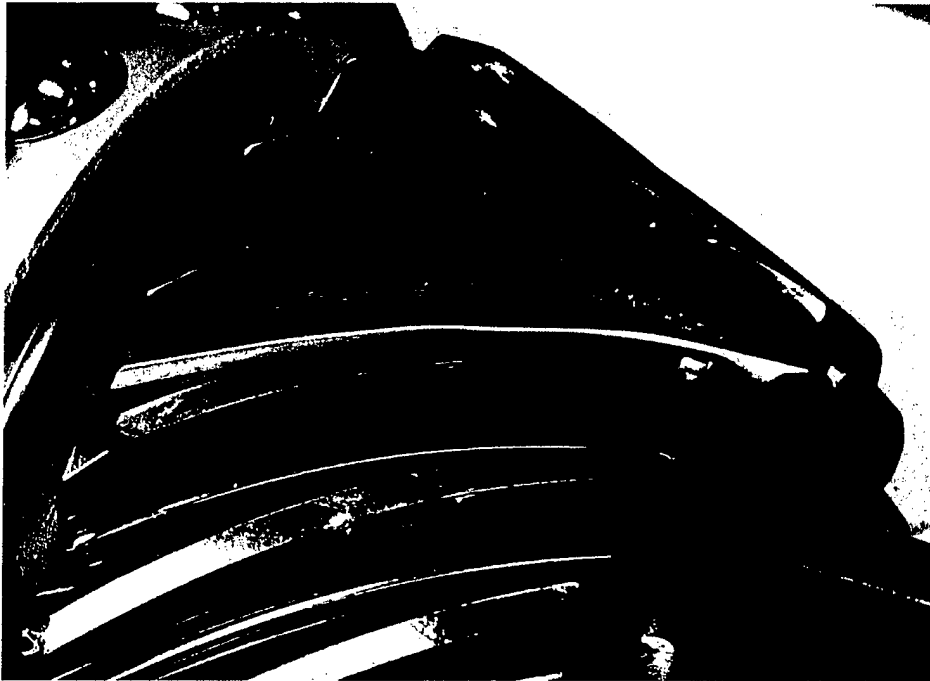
Spiral-bevel pinion tooth contact, low-noise, improved-bearing-contact design.
